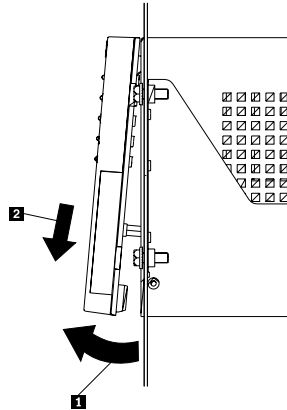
Removing the controller-unit bezel (machine types 3526 and 3552)
